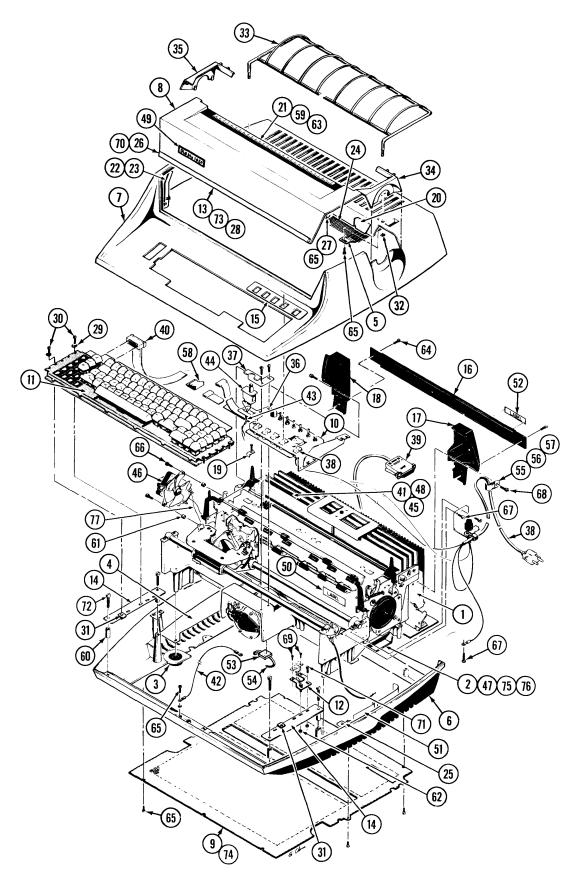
la 23XXX-XX FINAL ASSEMBLY
